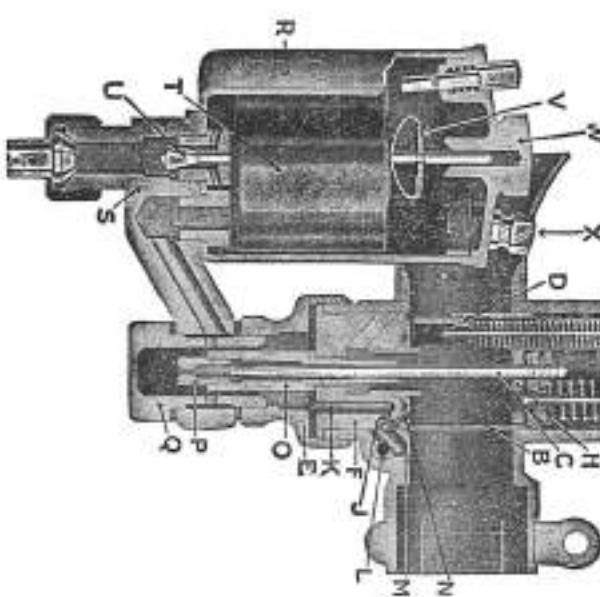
SECTIONAL VIEW OF AXIAL SIMULTANEOUS TWO-LEVER CARBURETOR FITTED ON MANY J.A.P. ENGINES
